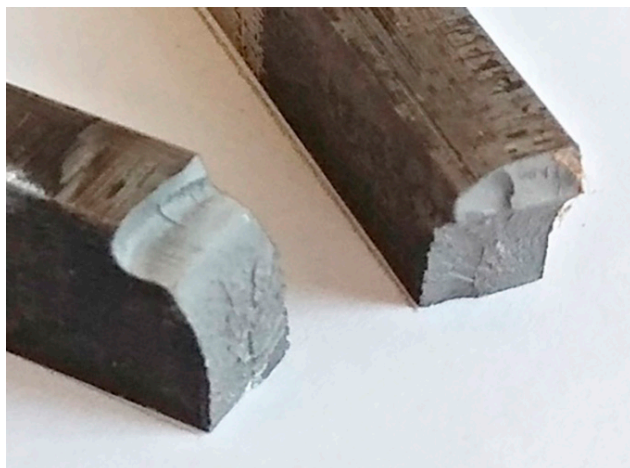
Fracture surface appearance – hardening oil (impact test)
